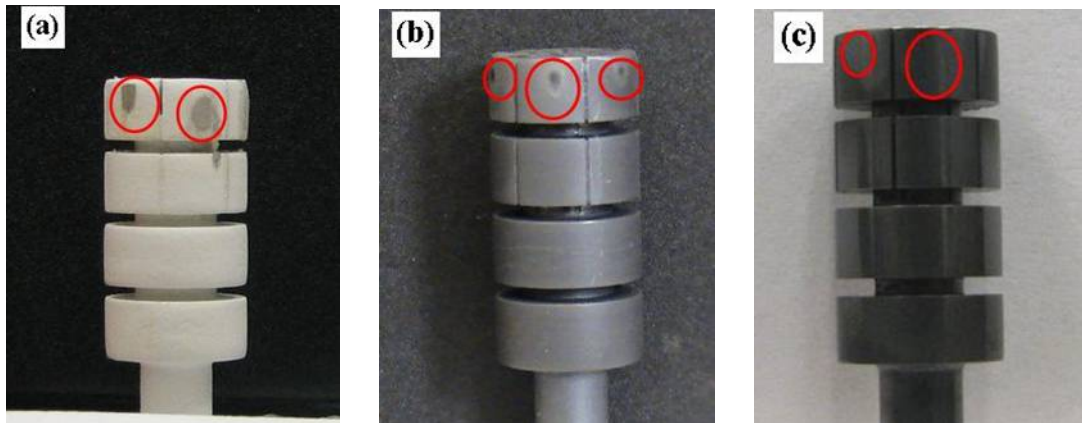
Pictures of the surfaces of the, (a) BN coated pin, (b) A.S. WS₂ coated pin, and (c) S.B. WS₂ coated pin after the hot forming experiment with red rings around strip contact areas showing visual coating loss
